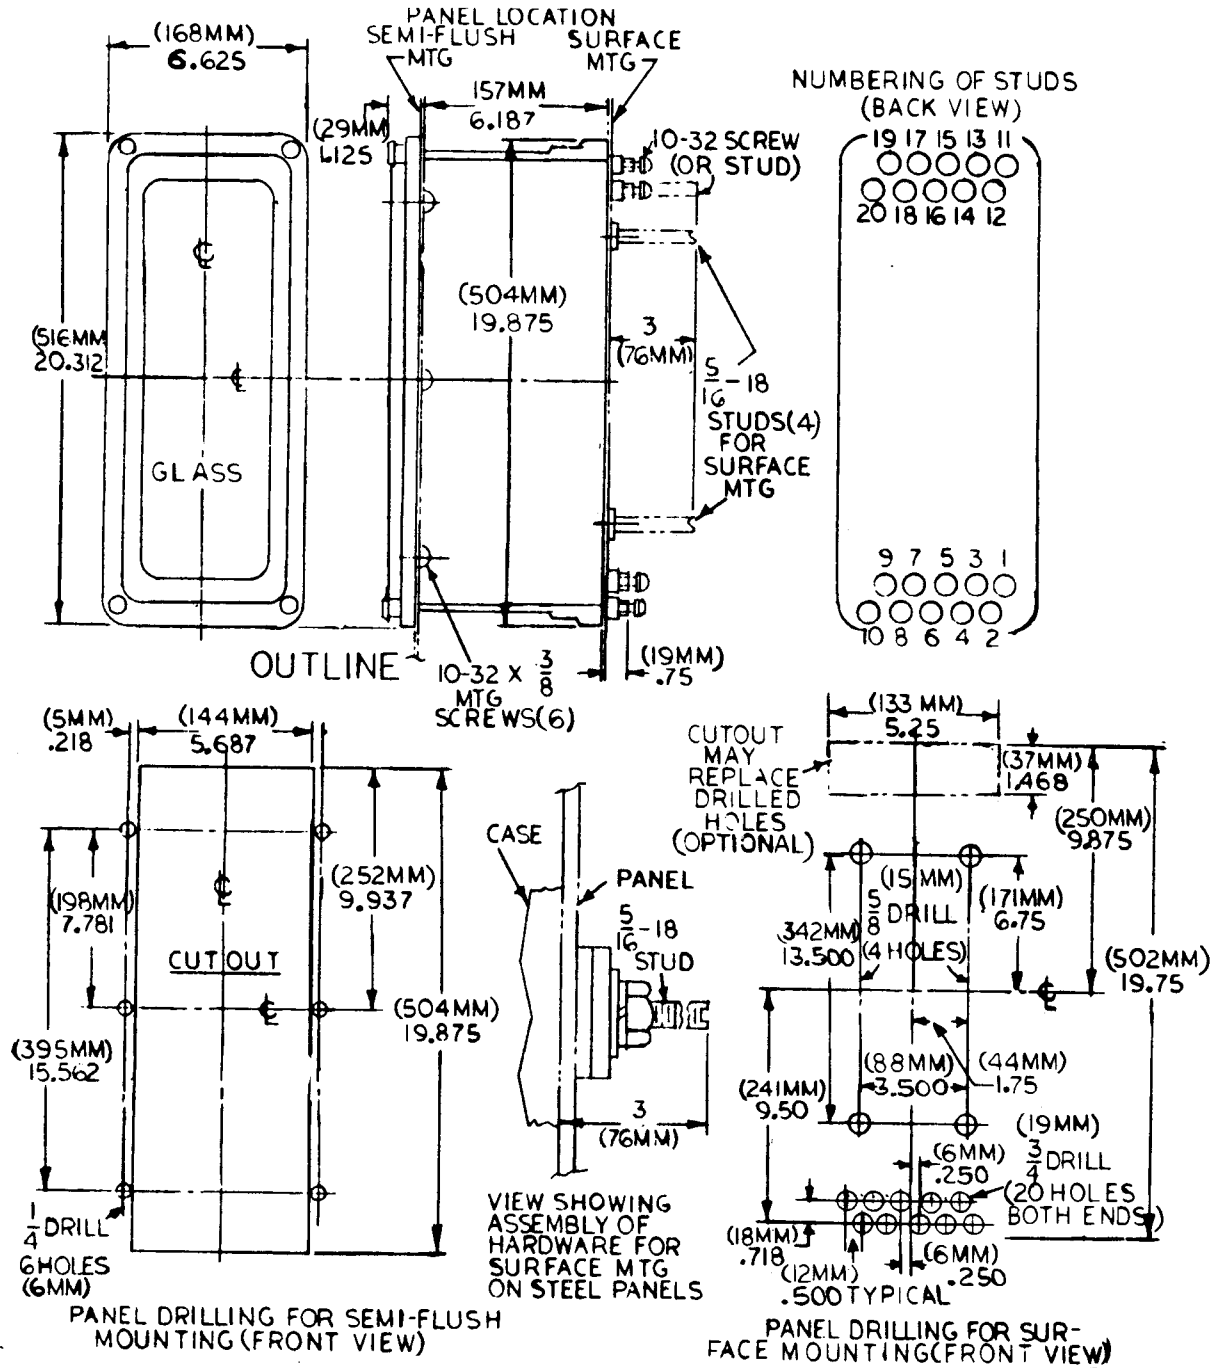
(6209276-3) OUTLINE AND PANEL DRILLING DIMENSIONS FOR RELAY TYPE BDD18B
